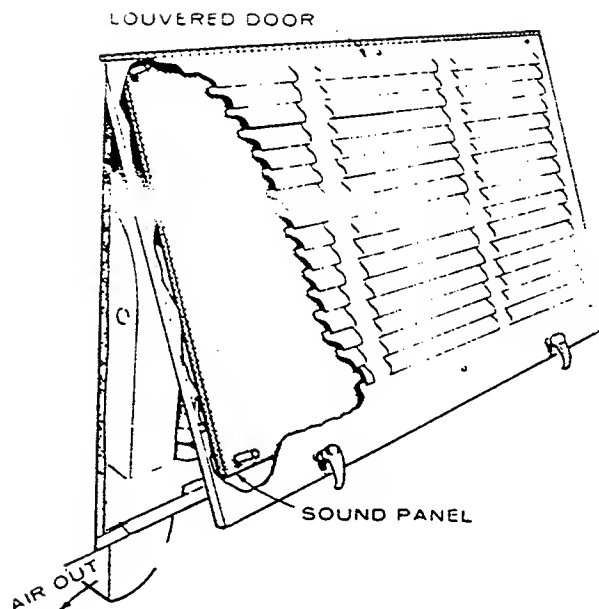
TYPICAL LOUVERED DOOR AIR INLET
